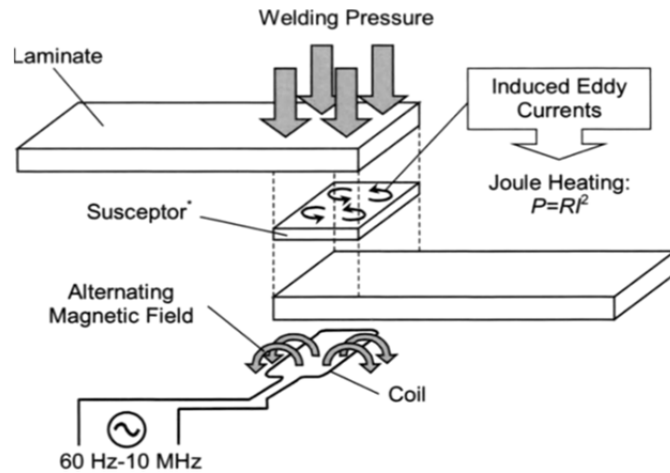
Induction welding set-up for lap shear specimens [44]
